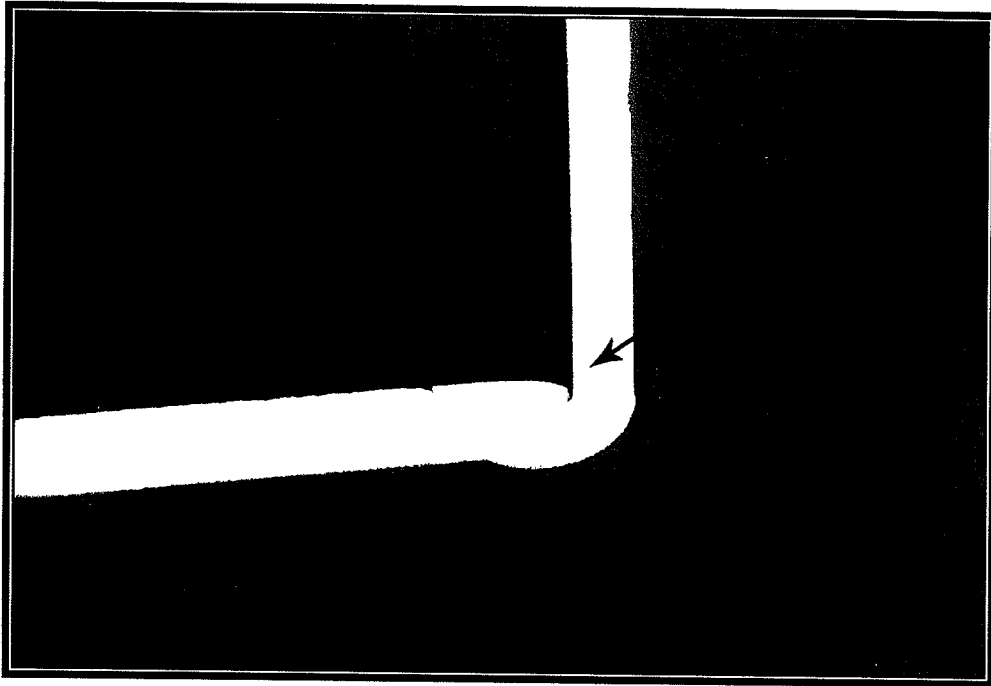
Photograph of weld cross section IIC, quadrant three, showing some lack of penetration (arrow).
